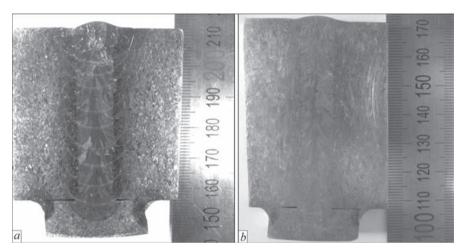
Cross-macrosections of welded joints of PT-3V titanium alloy made by GTAW-NG with a controlled magnetic field: *a*—welded joint of 45 mm thickness, mode No. 1; *b*—welded joint of 65 mm thickness, mode No. 3
